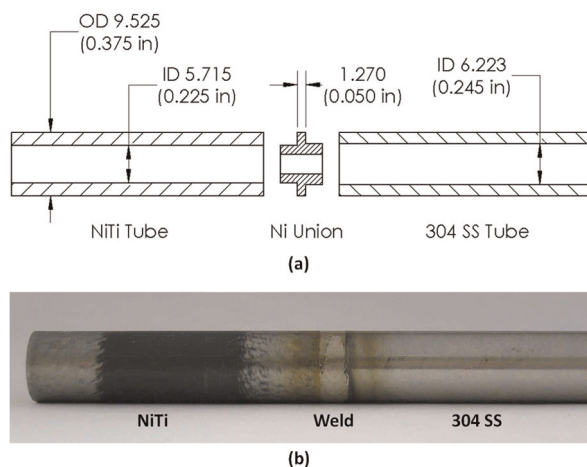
(a) Exploded diagram of TIG-welded specimen; (b) photograph of completed TIG weld.
